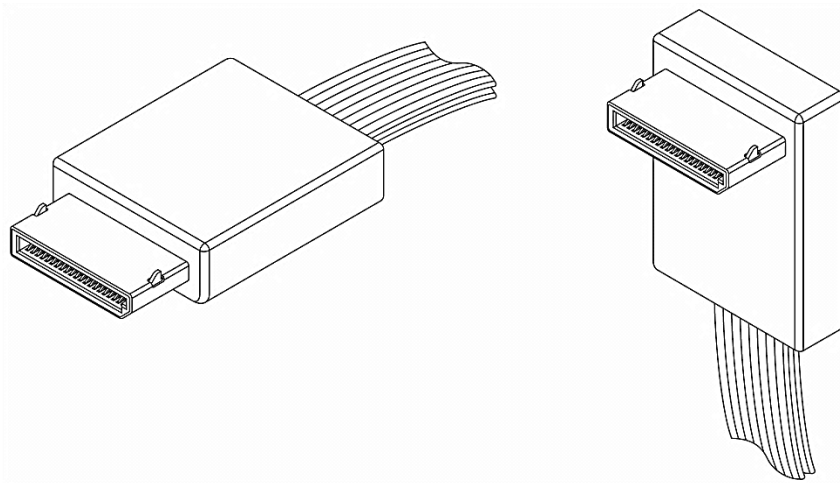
Pin number locations for x4 Free Cable Assemblies
